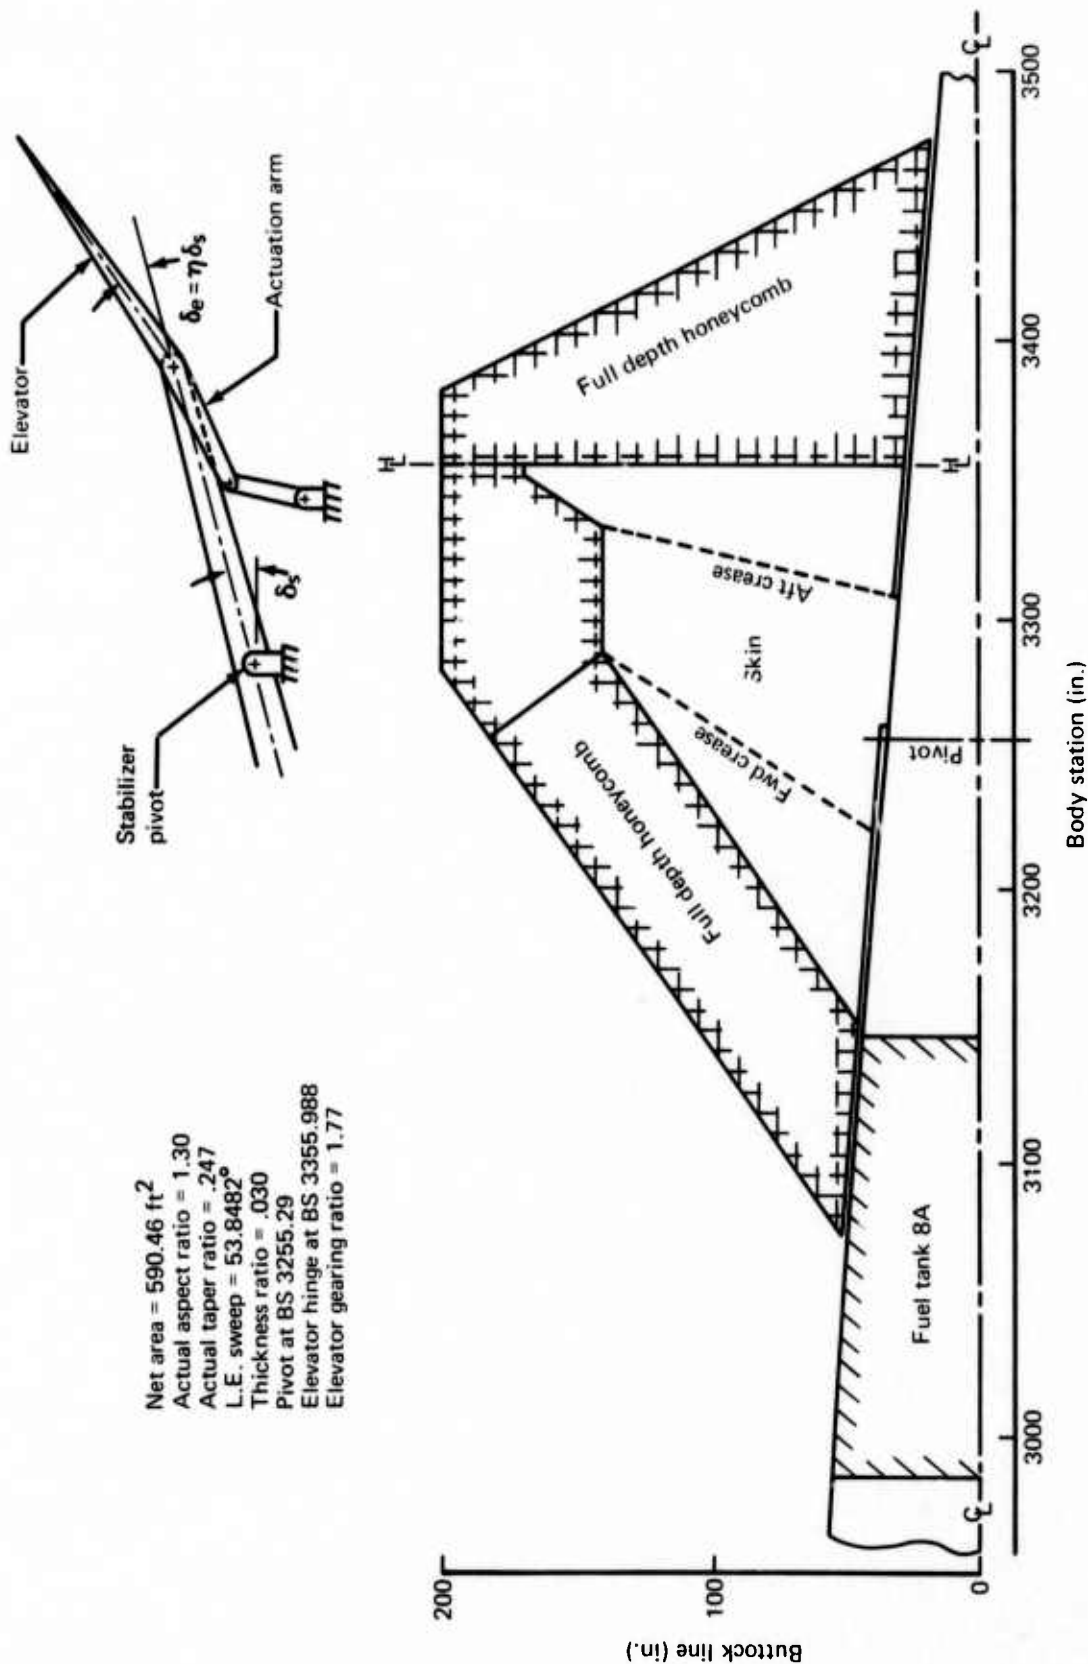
HORIZONTAL STABILIZER STRUCTURAL CONFIGURATION
